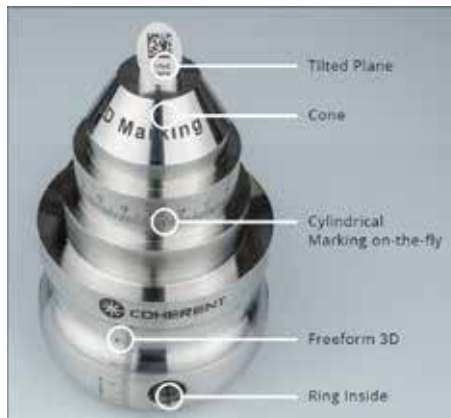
The new "smart" approach enables marking on virtually any shape or surface orientation, even marks inside holes and insets.
